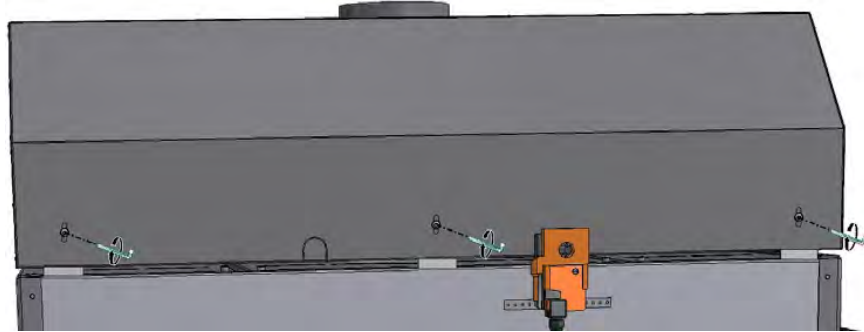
Example: Positioning and fastening the exhaust hood/s (similar to picture)
